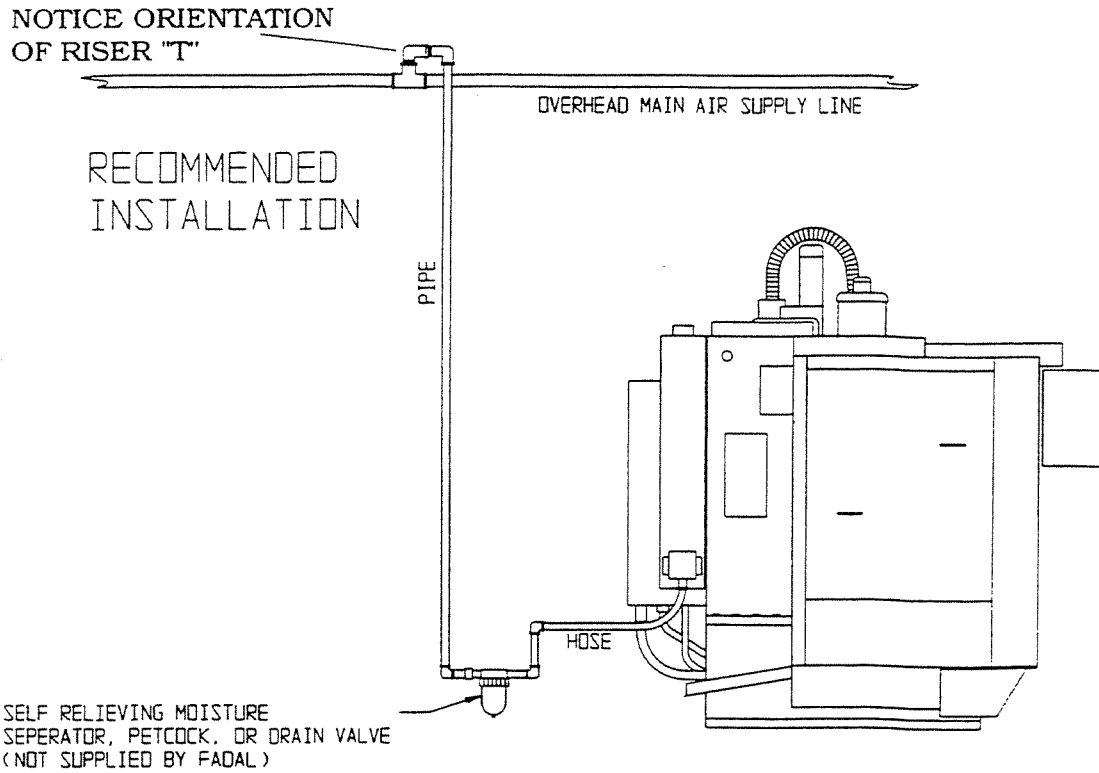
RECOMMENDED - AIR INSTALLATION
